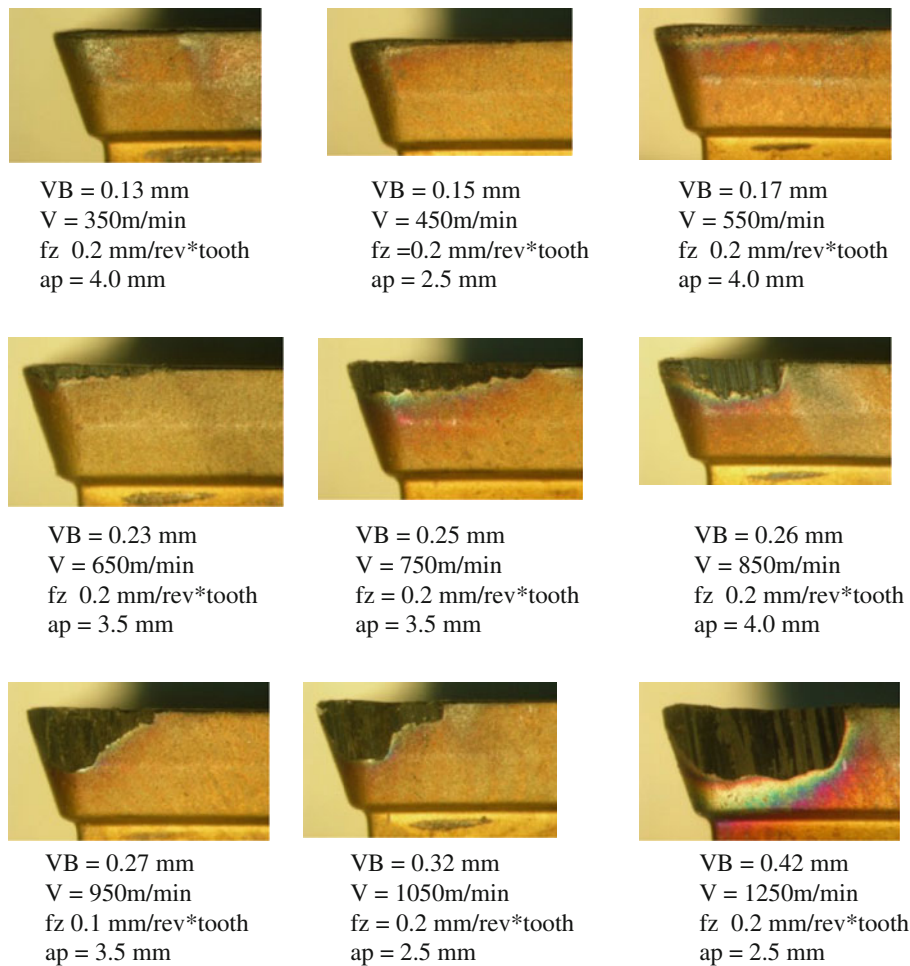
Few examples of tool wear evolution when face milling AISI 1045 under different cutting conditions
